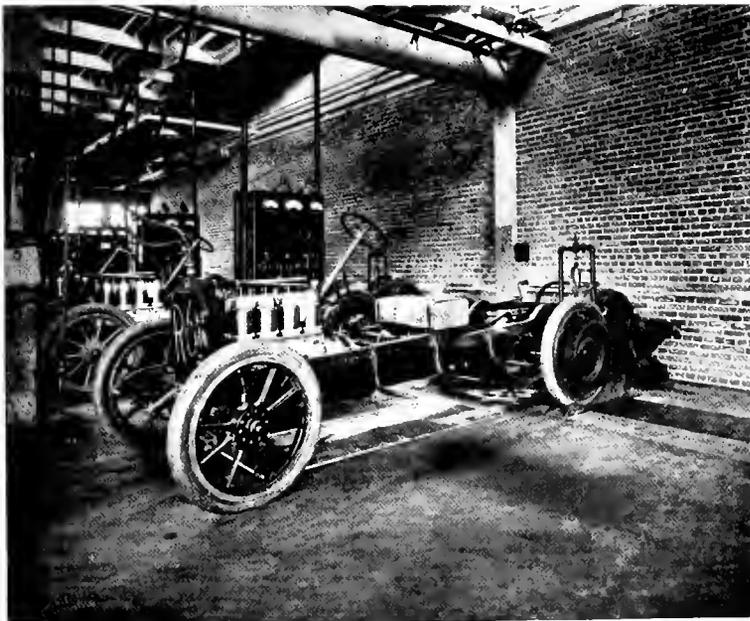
Chassis-testing Dynamometers in the Plant of the Cadillac Motor Car Company, Detroit
